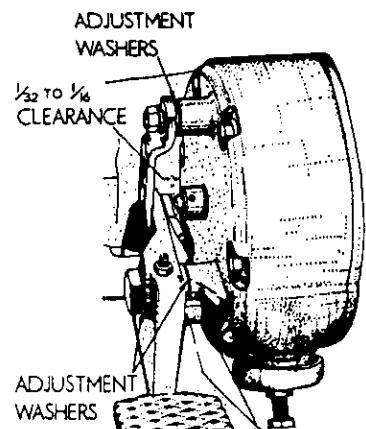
Use adjustment washers as shown to adjust cam plate clearance.
